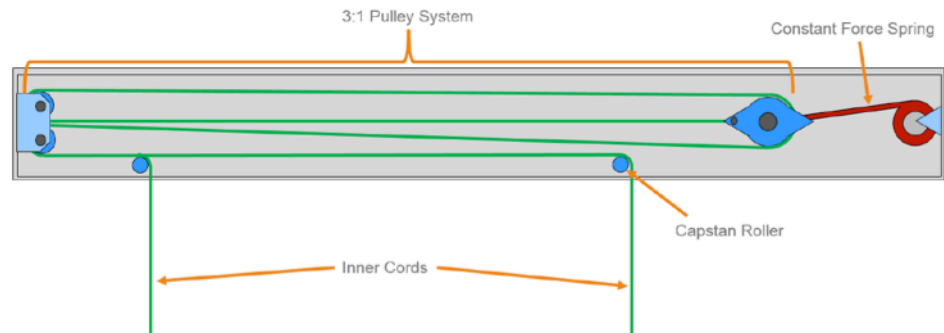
Mechanism 7 Design Pulley Actuated Cordless
